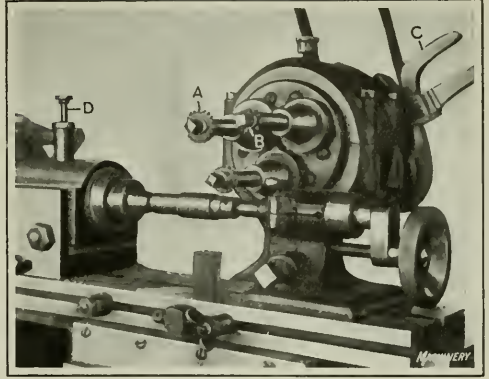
Milling Machine with Special Cutter-head for machining Gage Train Wheels
